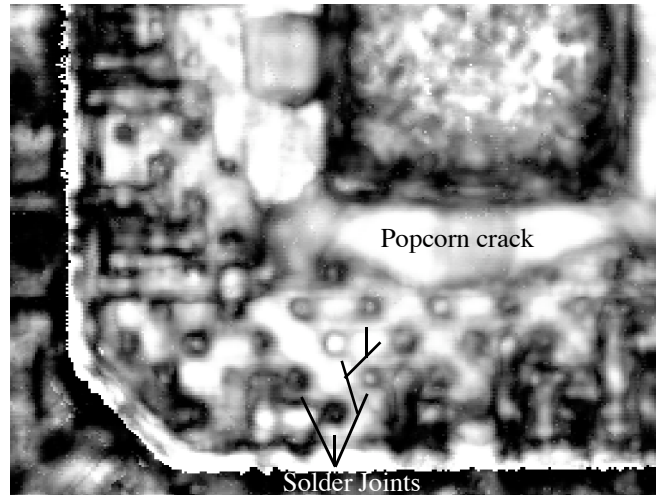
B: C-Mode image of a popcorn cracked BGA at the solder joint level.
